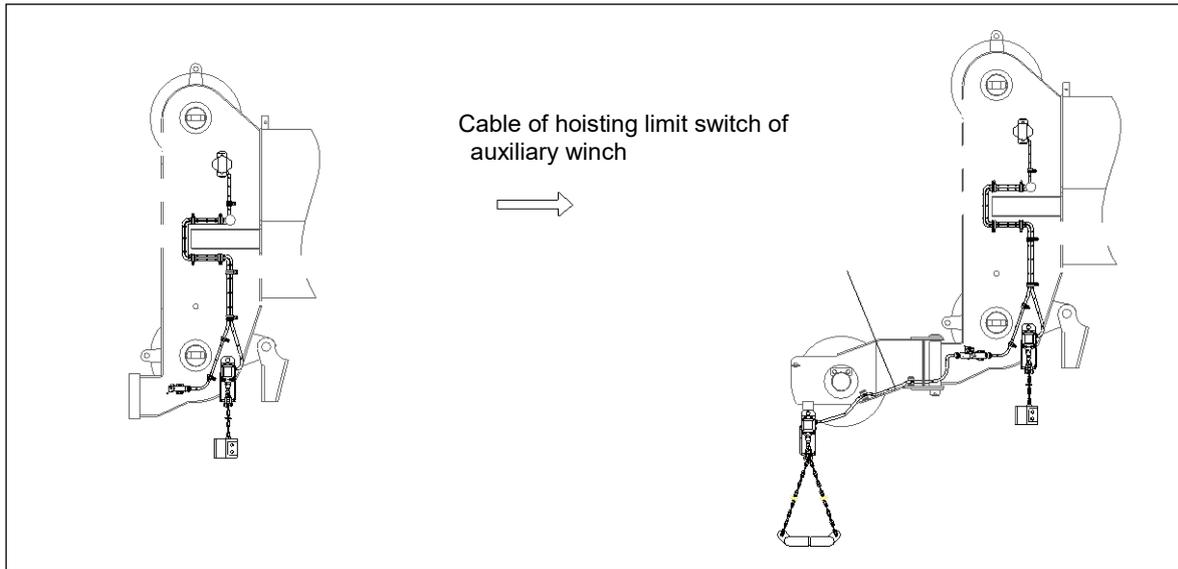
Installation of hoisting limit switch on the rooster sheave
